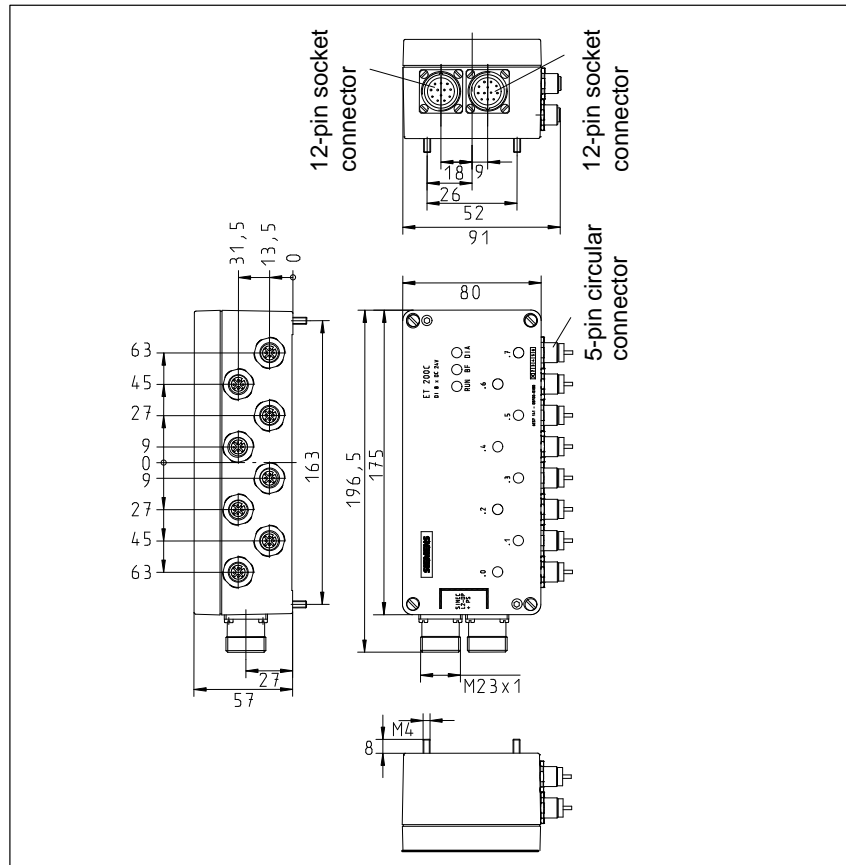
Digital Input Module ET 200C; DI 8 × DC 24 V; Dimension Drawing
